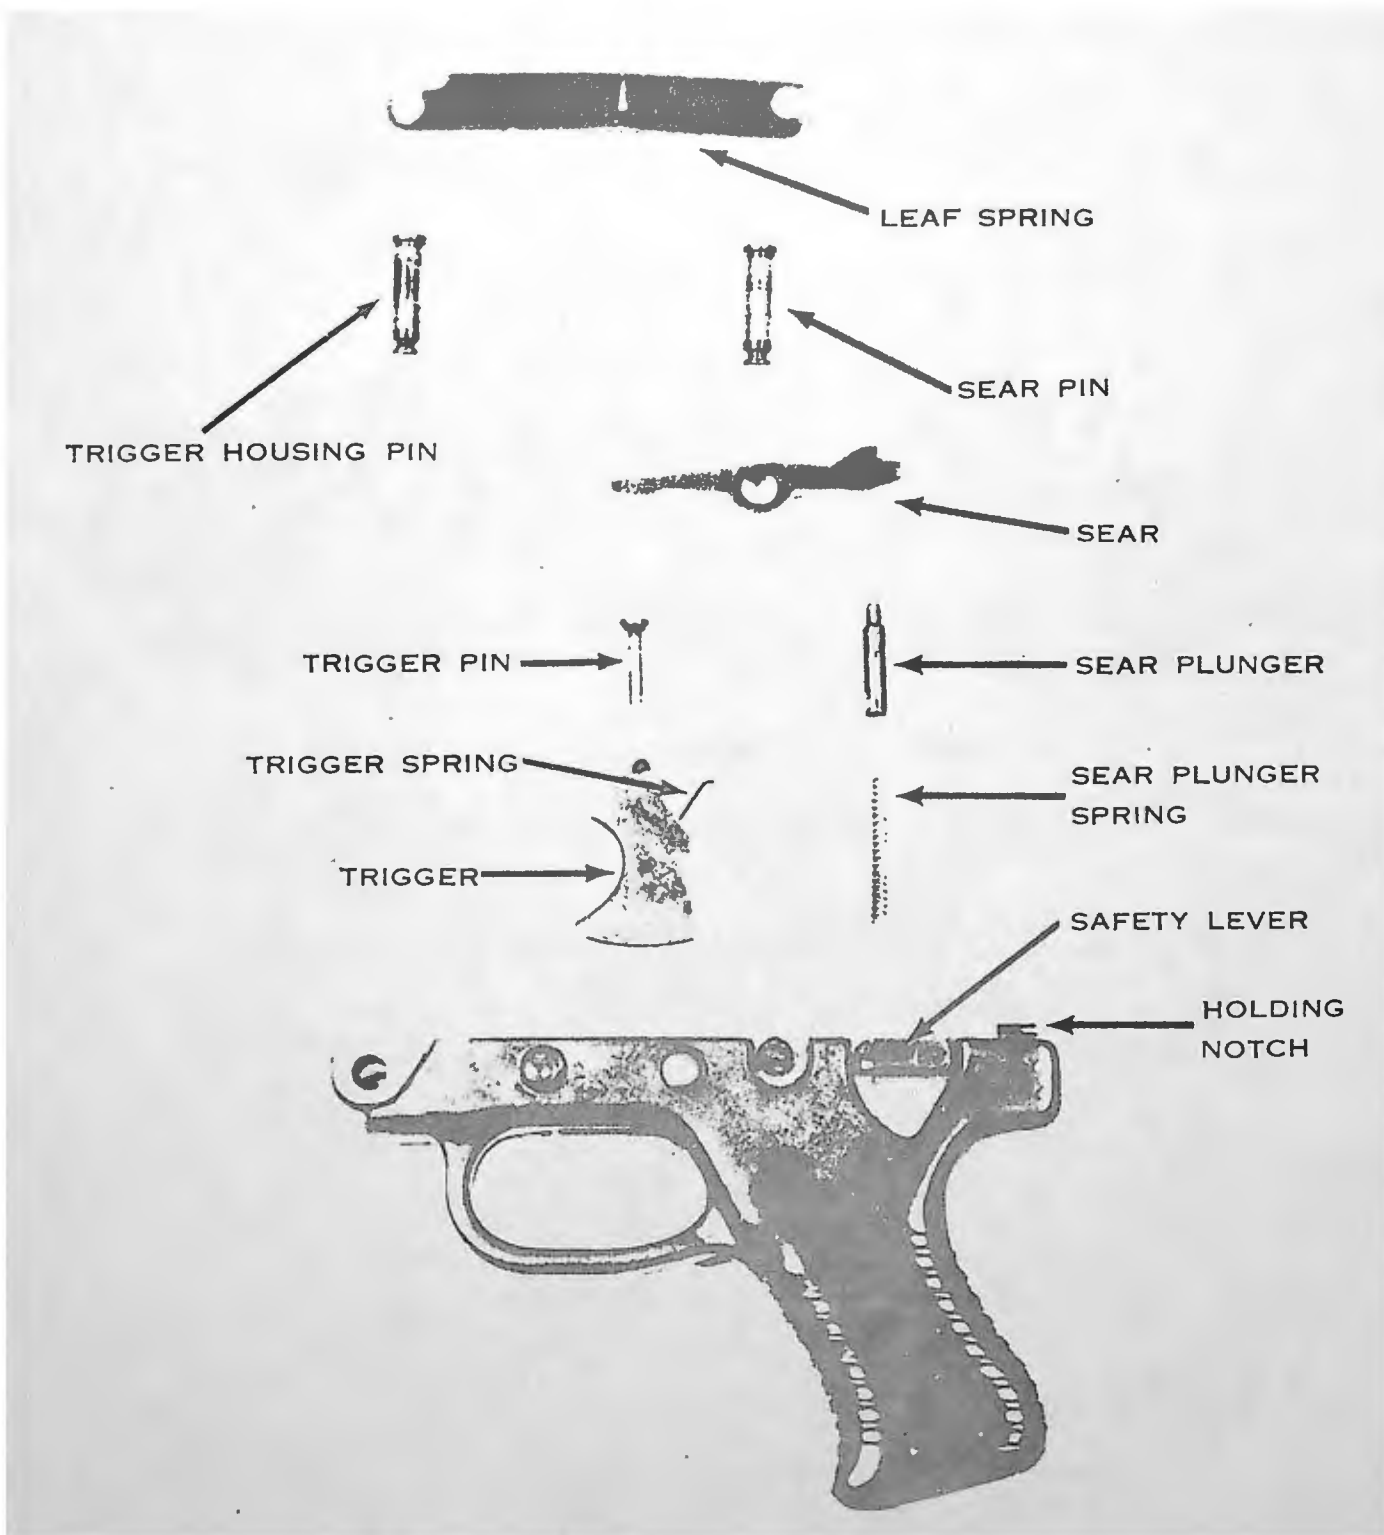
TRIGGER HOUSING GROUP DISASSEMBLED
